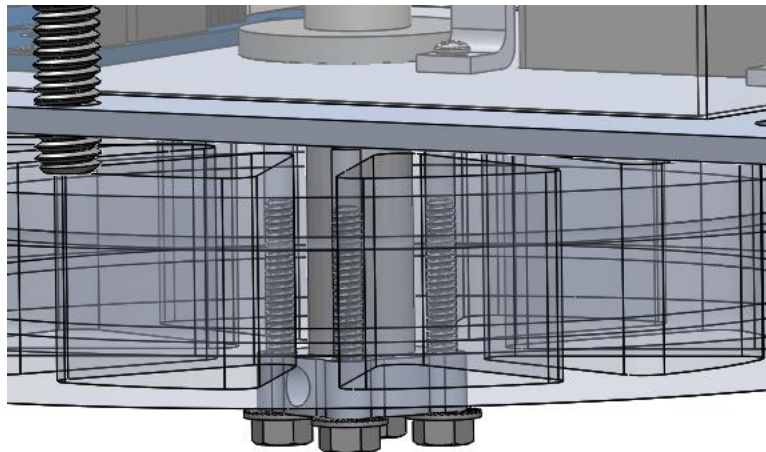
Depth of screws shown in tapped holes of transparent aluminum pulley
